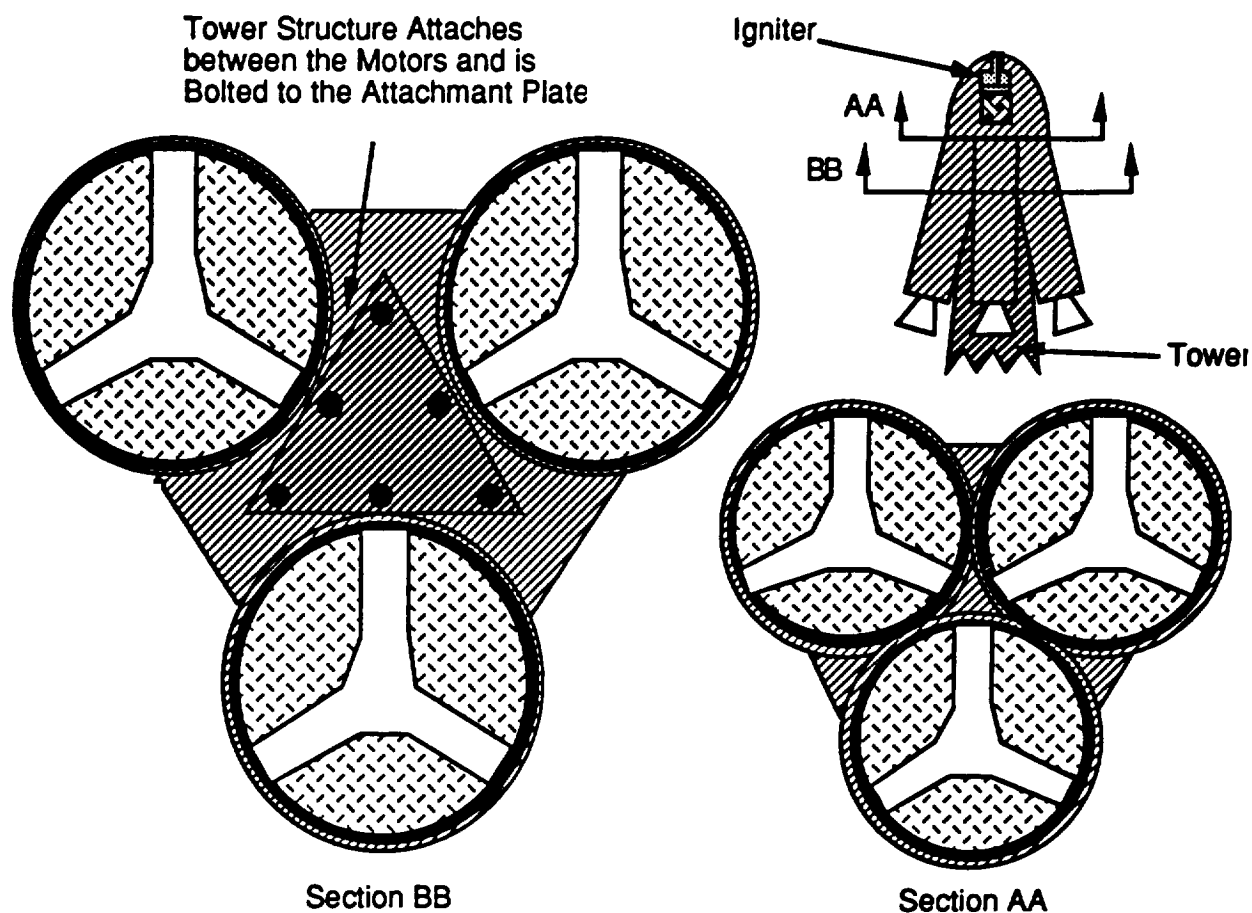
N: Cross Sectional Views of the Abort Motor System
